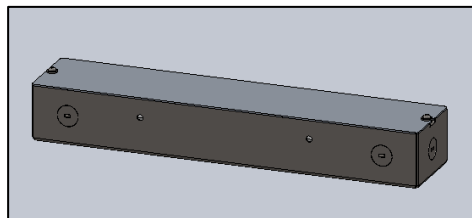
REMOTE BOX WITH DRIVER INSTALLED
